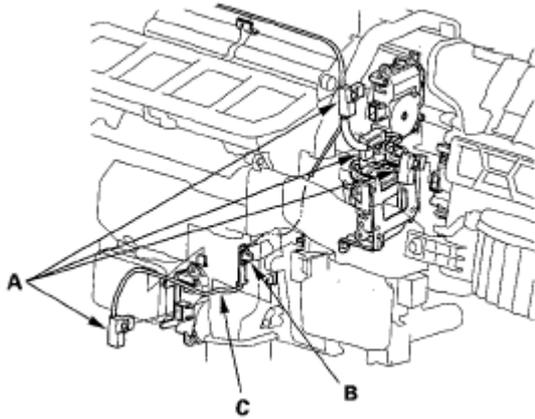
Identifying Wire Harness Clip, Wire Harness And Control Motor(s) Connectors
